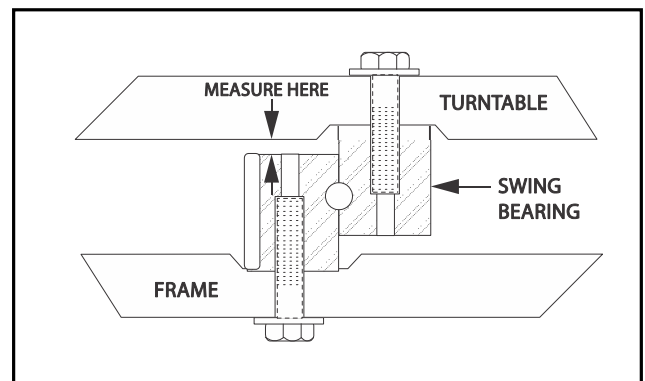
Swing Bearing Tolerance Measuring Point
